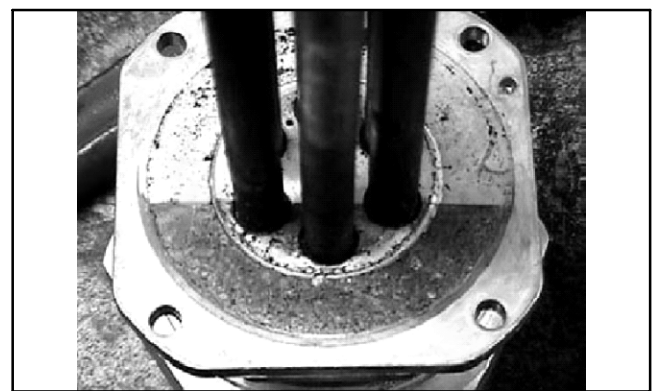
Heater Showing Coolant Line from Horizontal Mounting
